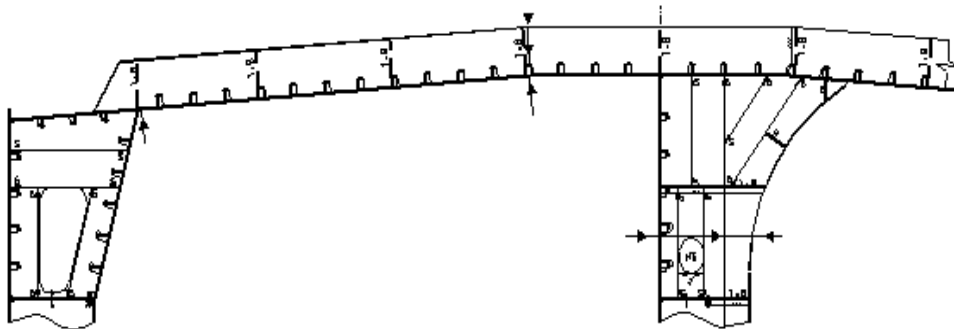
Structural arrangement of upper deck transverse web at the new design
